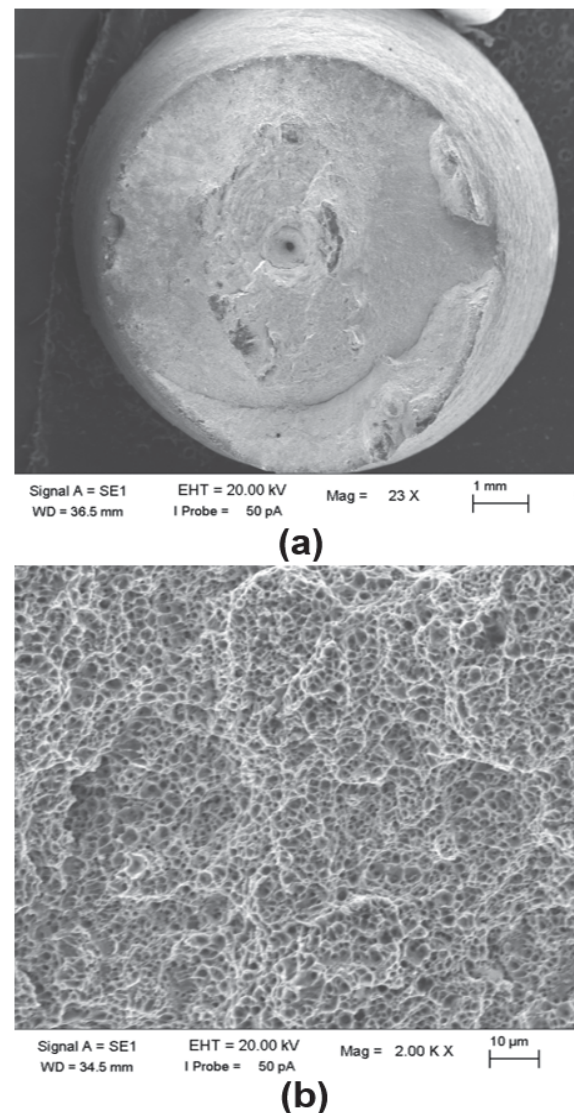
Low (a) - and high (b) magnification SEM fractography of fractured tensile specimens of E911 weld metal
